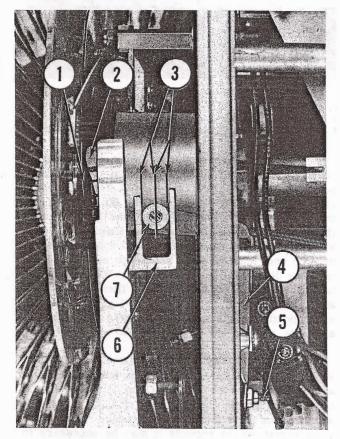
TONE ARM LATCH LEVER ADJUSTMENT
